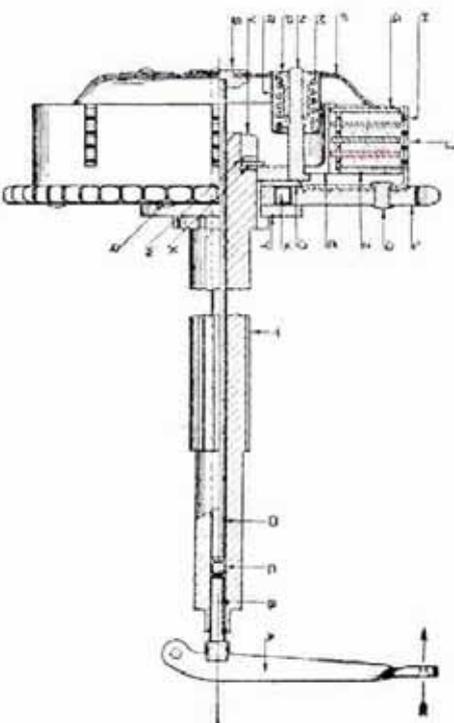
CLUTCH AND CLUTCH-OPERATING MECHANISM (C.P.-TYPE GEARBOX).
